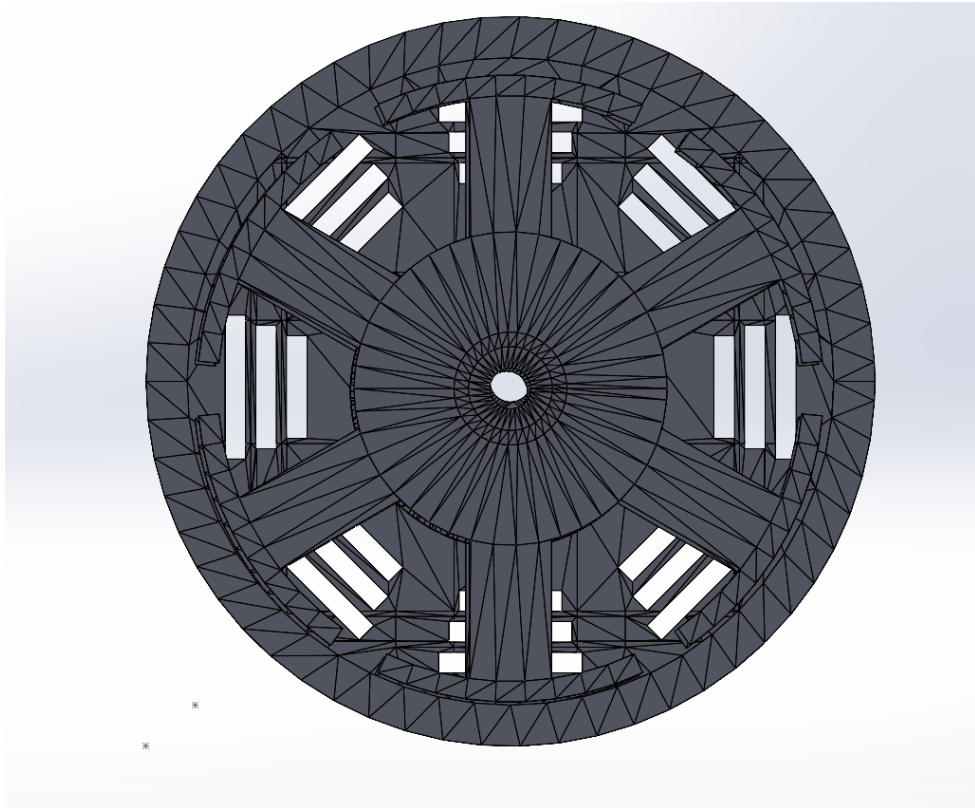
Front view of the assembled BLDC motor showing the rotor can aligned around the stator
